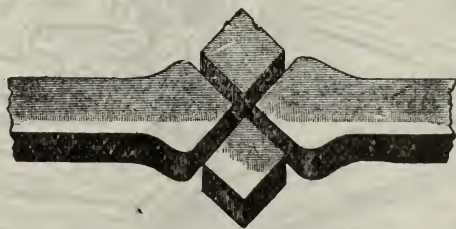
,483, *Glut weld*. A weld in which the ends of the two parts are tapered down, and the angles filled with wedges of iron, the whole being welded together while checking the length with a trammel, excess material being subsequently cut away. This type of weld is generally used in repair work where it is necessary to maintain unchanged the length of the broken part.
